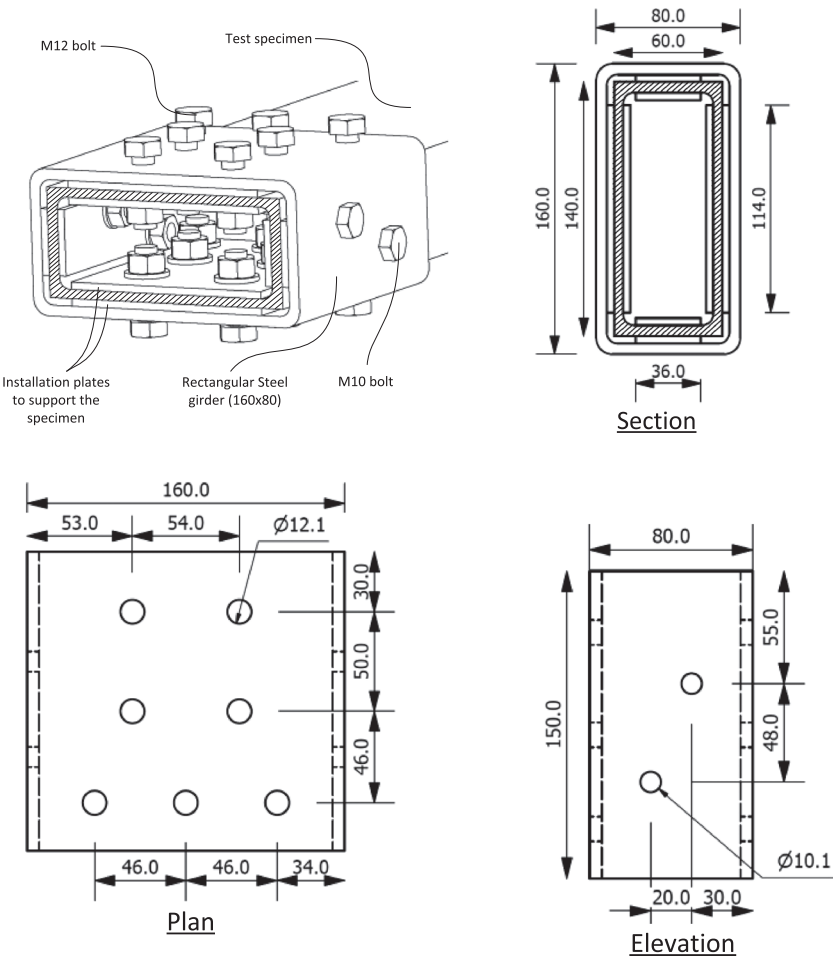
Clamped support of the experimental substructure displaying plan, section and elevation view
